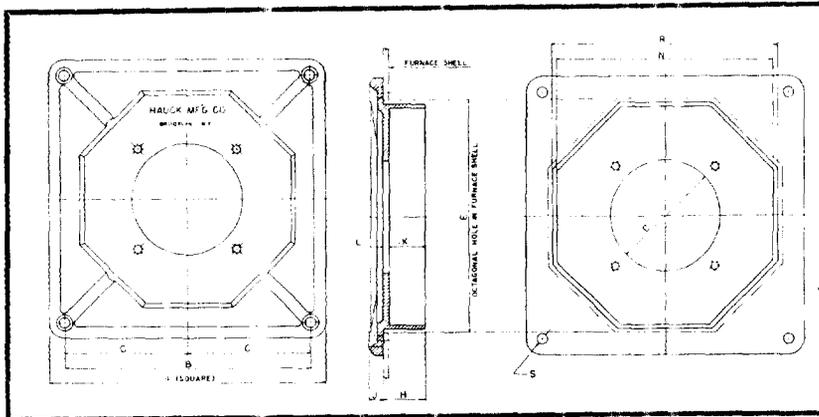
All sizes of Furnace Mounting Plates except No. 779-STD, can be furnished with holes for attachment of Electric Eye Assemblies; see page 11. The No. 779-STD and HD Mounting Plate and Mounting Bracket are of one-piece construction for the No. 779 Burner (page 8). When a 779 Pyramid Mounting Bracket is to be used, the No. 779-HDP Plate is required.
